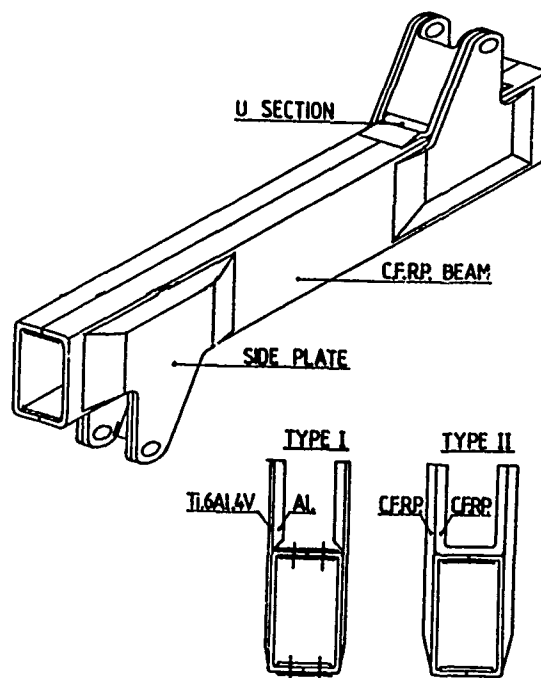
TEST SPECIMENS ACTUATOR ATTACHMENT POINTS
